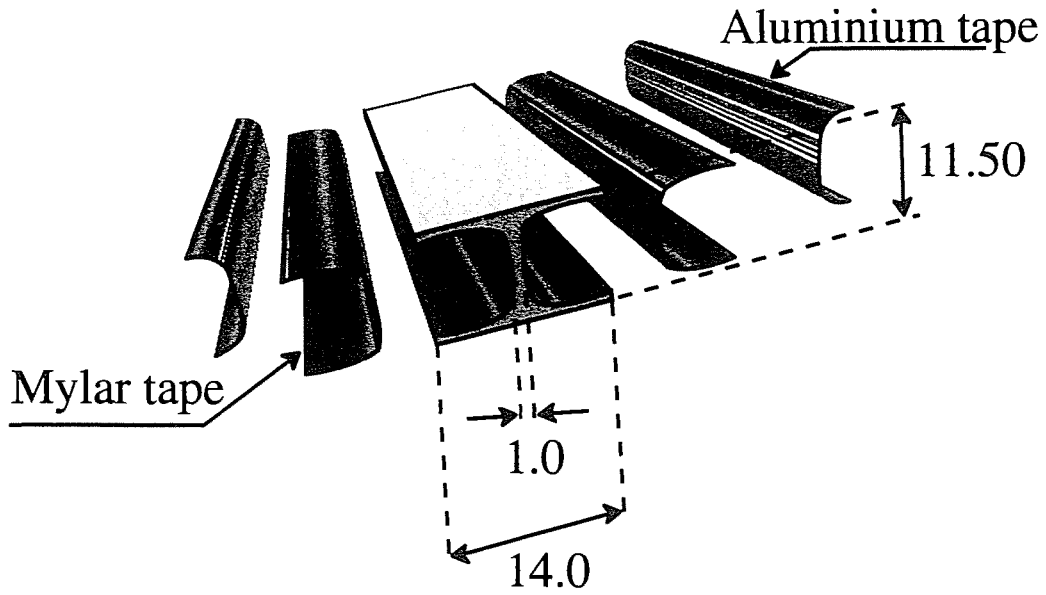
Schematic exploded view of the cathode I-beam configuration in the new design. Dimensions are in mm.
